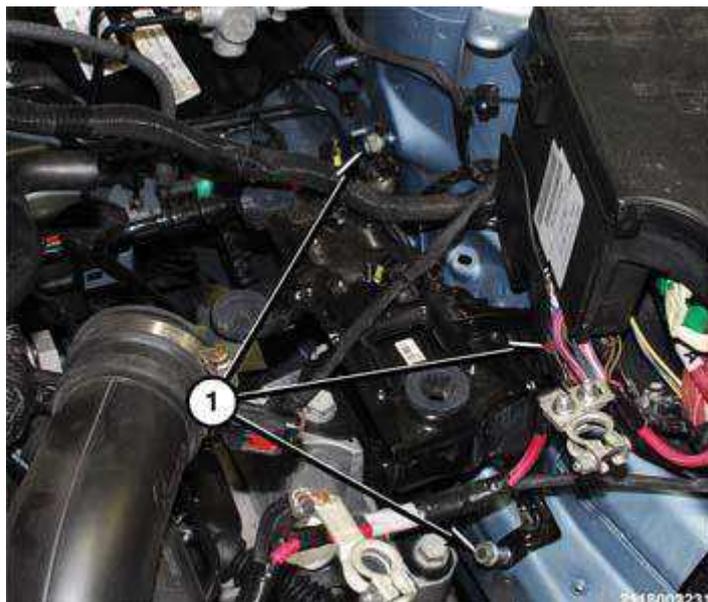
Air Cleaner Bracket Nuts & Bolts
